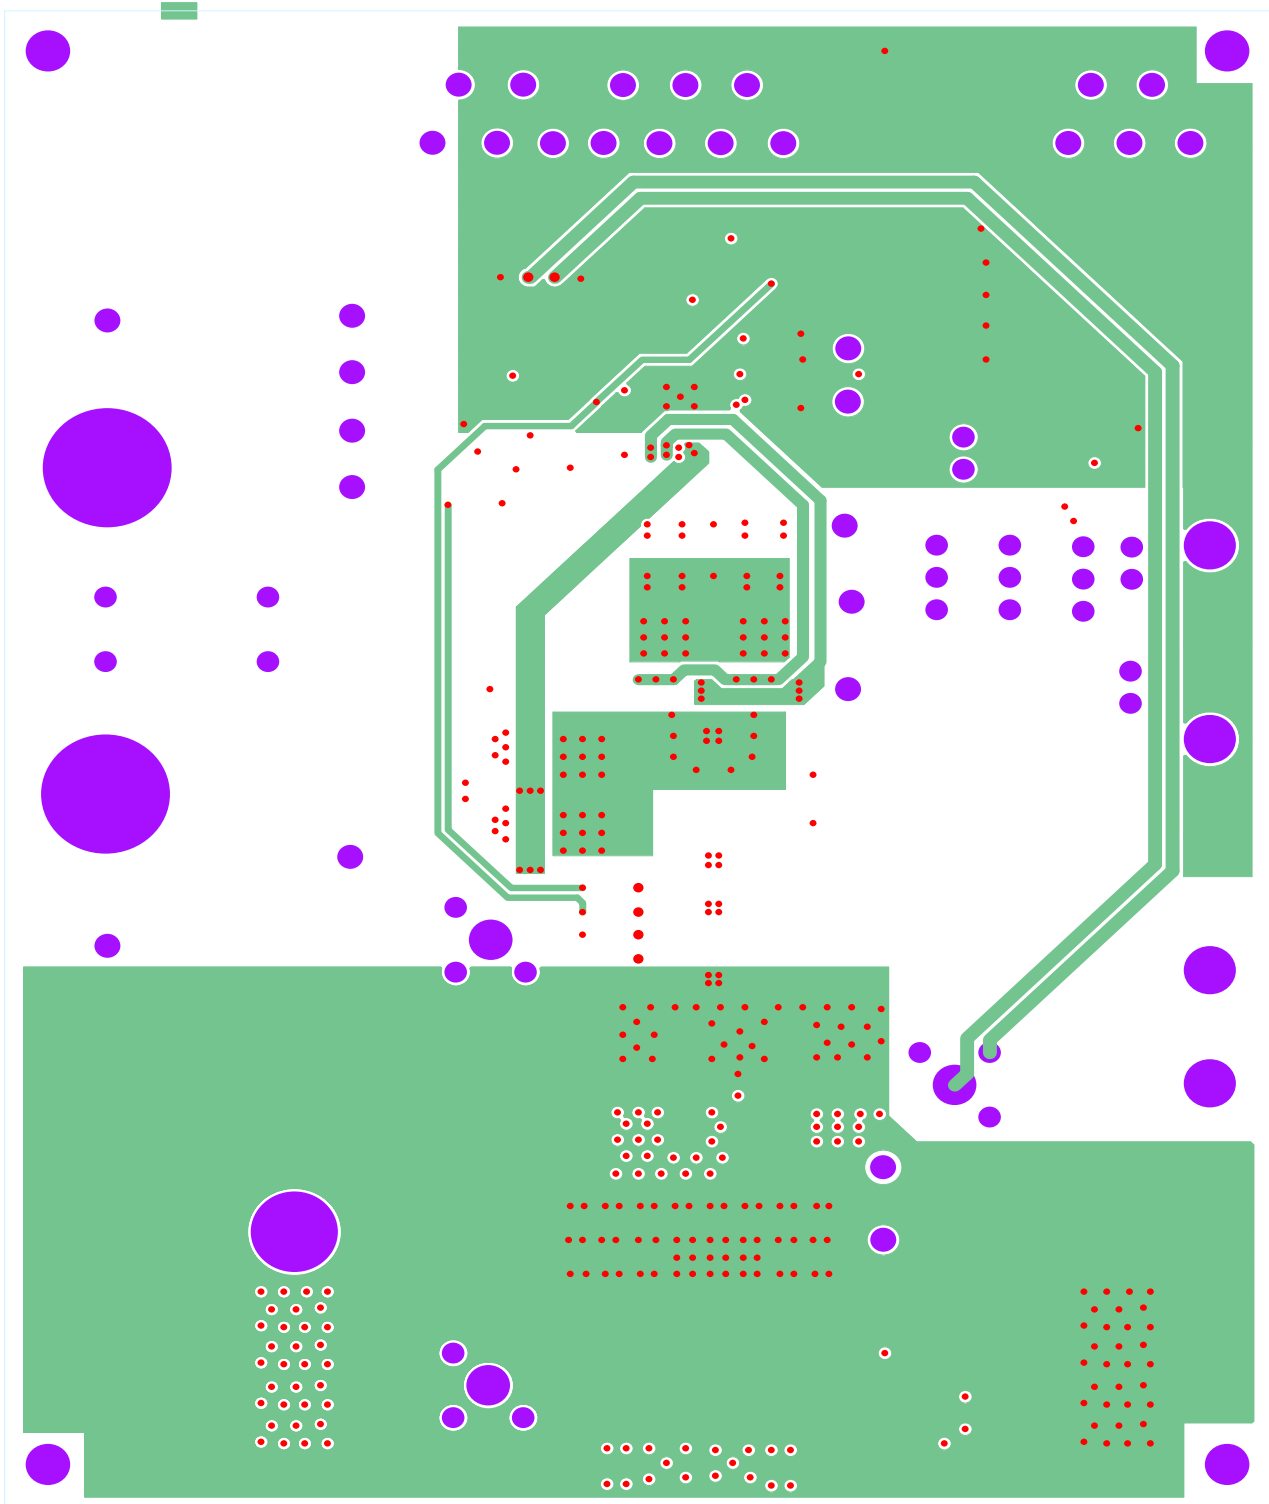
ISL6263CEVAL1/1Z and ISL6263DEVAL1Z EVALUATION BOARDS PCB LAYER 3 ETCH
